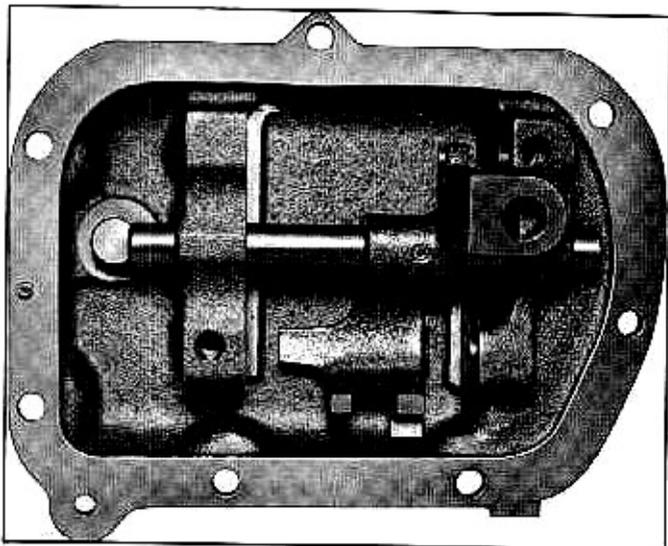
B—3-4 Shifter Shaft & Head Installed to Cover
